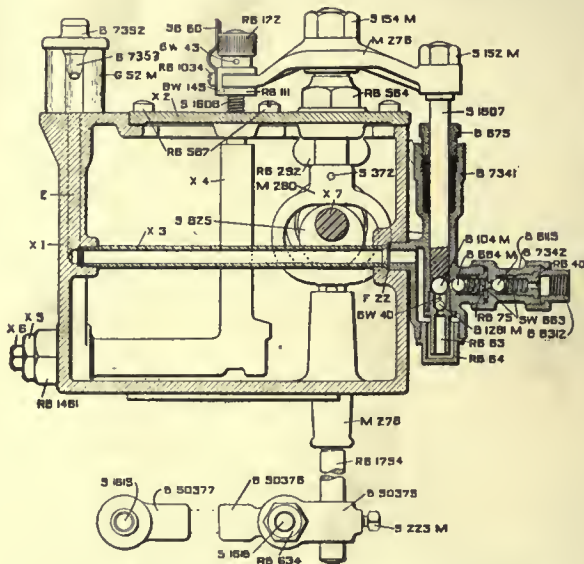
MECHANICAL CYLINDER LUBRICATION. SECTION THROUGH LINE B.B.
